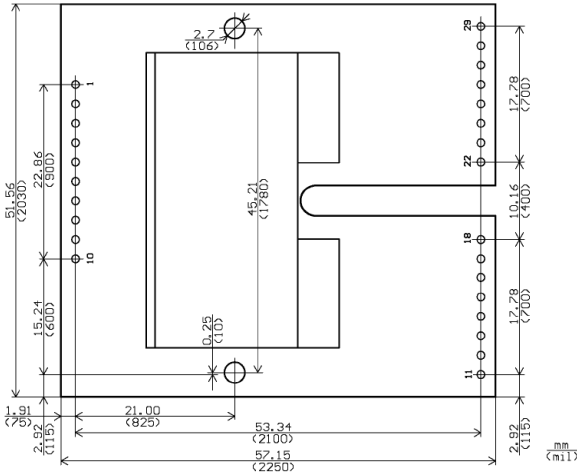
Dimensions of a standard Power Integrations gate driver core
